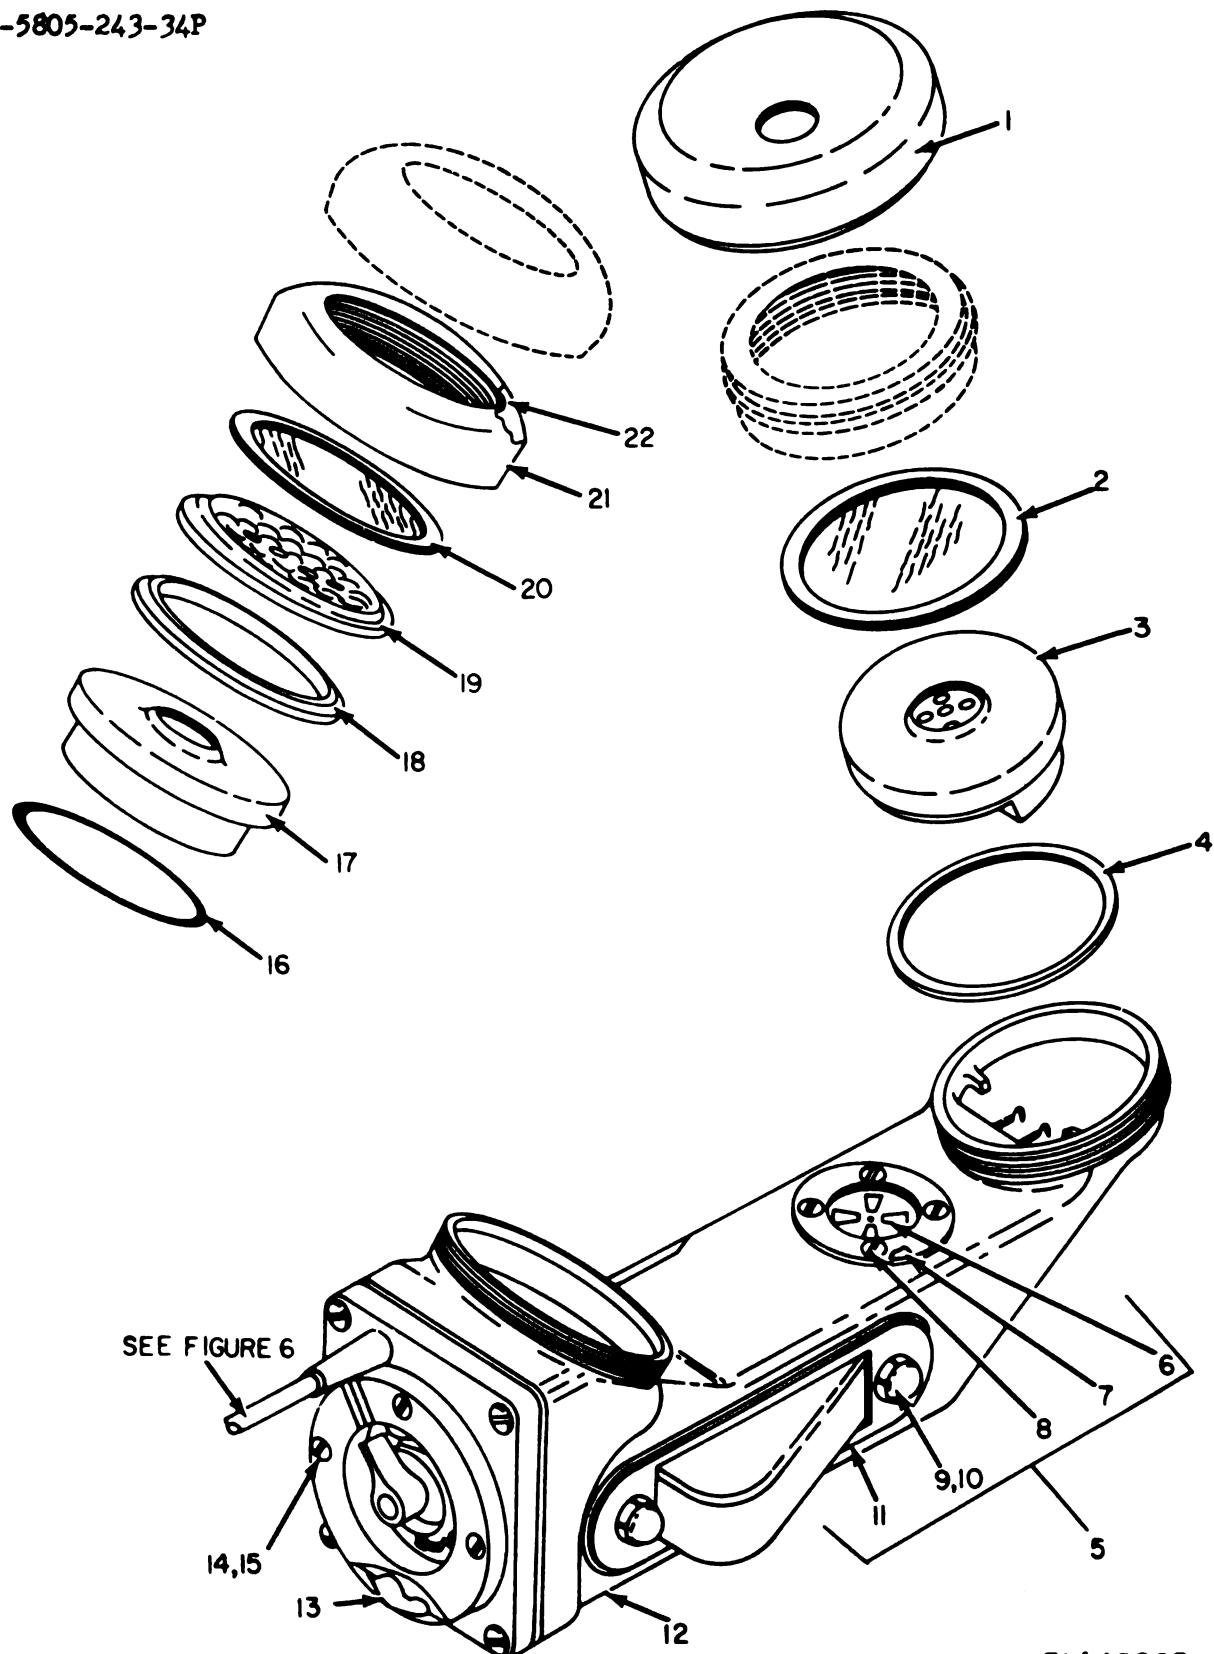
Telephone Set TA-1/PT, Chassis Assembly.
